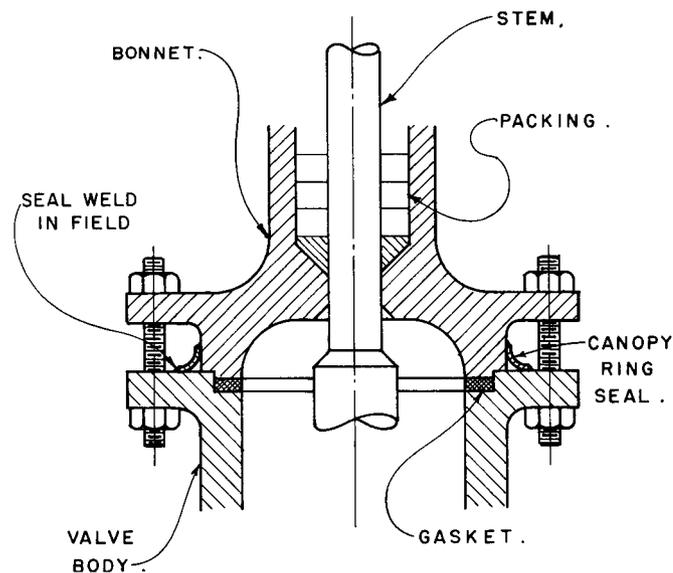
Seal-Welded Backup for Bonnet-to-Body Closure in Type I Valves.
